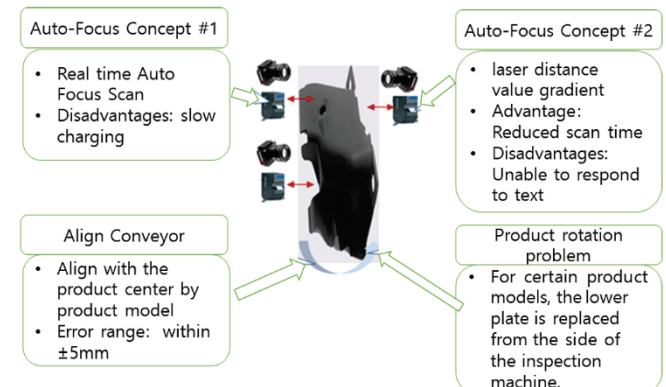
Optical and real-time Auto-Focus processing H/W technology
